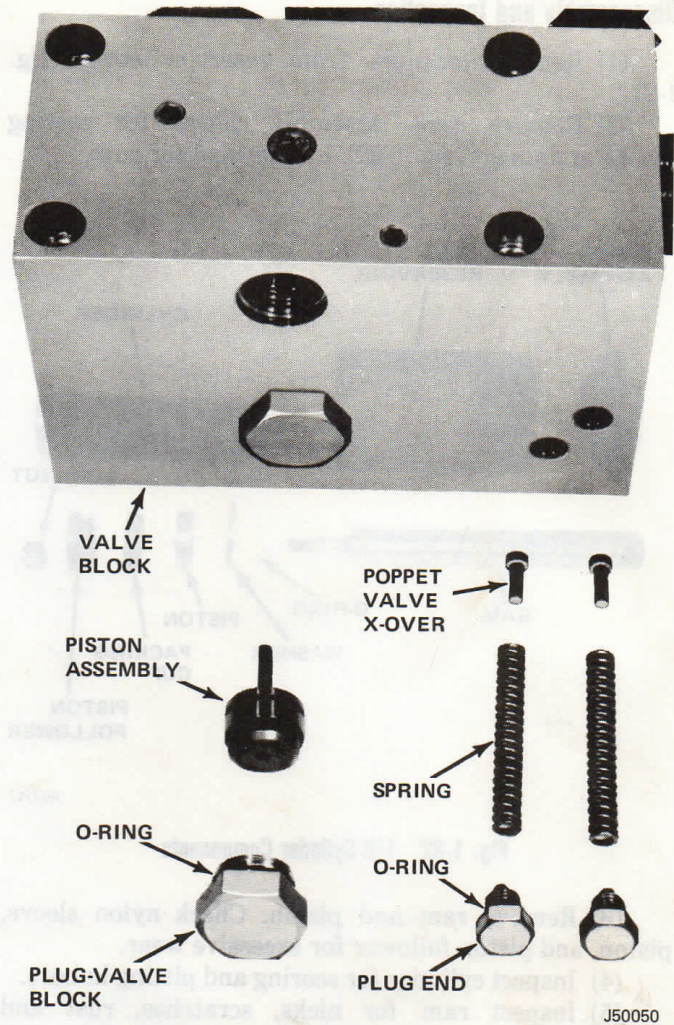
Piston Assembly and Poppet Valves—Exploded View
